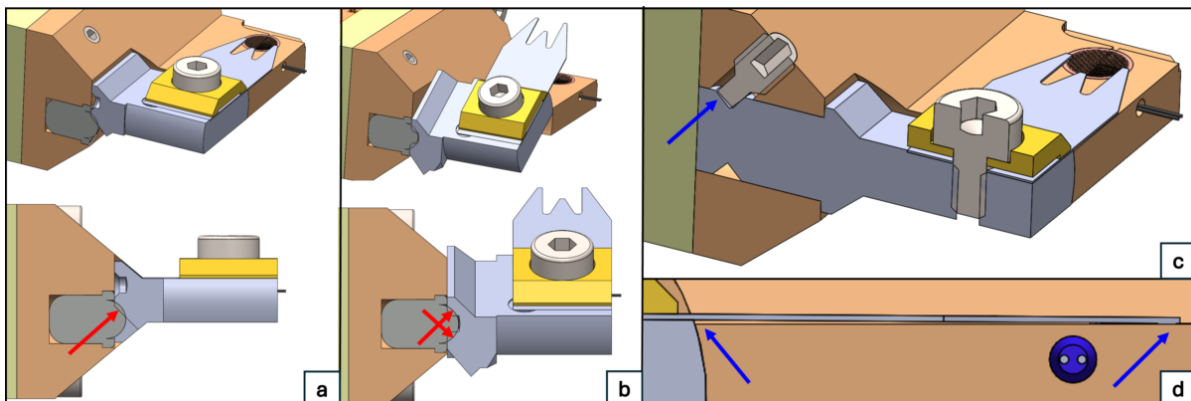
a. Section view of the ball detent and clip carrier in the closed position, with the ball pushing against a 45° angle to provide some holding torque on the grid clip. b. Section view of ball detent and clip carrier in the open position, with the ball registering in a 45° indentation. c. Section view of the clip carrier rotation pin, showing the set screw that constrains the clip carrier in place. d. Zoomed-in side view of the grid clip. The blue arrows indicate the clearance at the base of the clip and first contact at the tip when rotated to the closed position.
